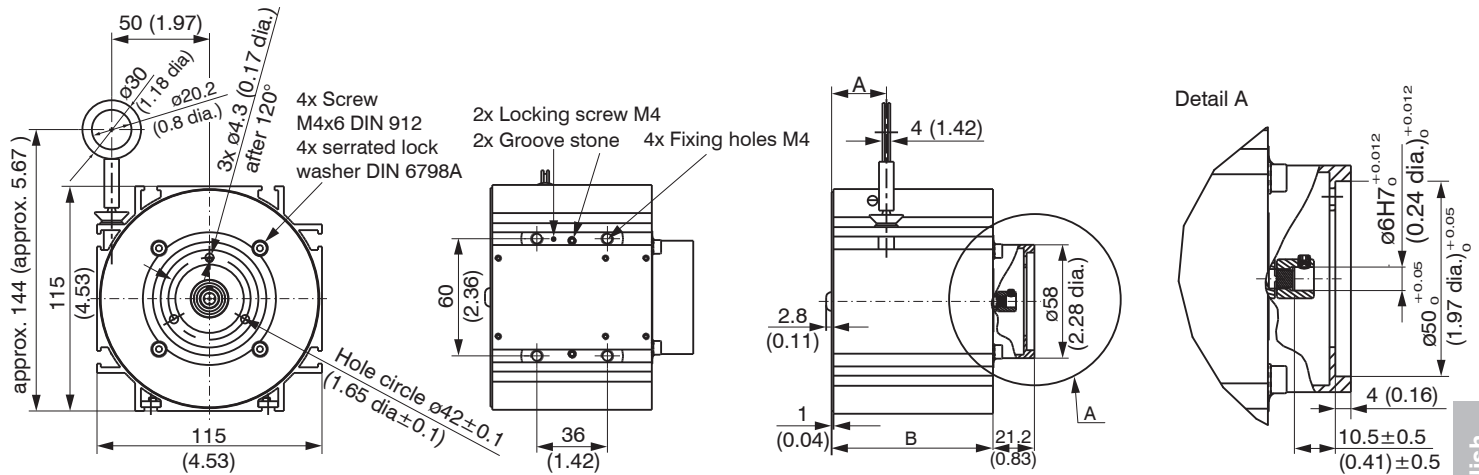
WDS-P115-M series, dimensions in mm (inches)
